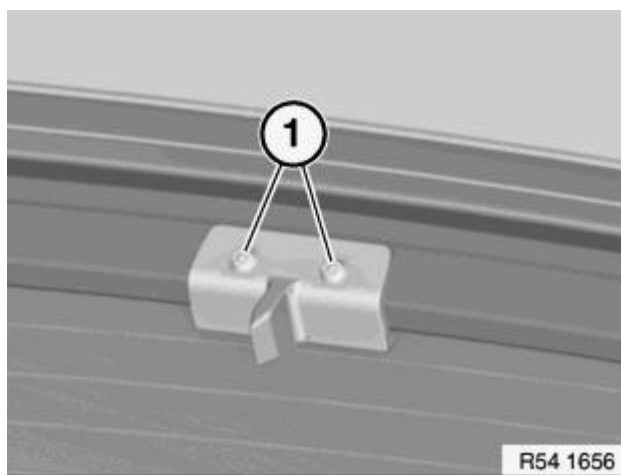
Ensure Fin Fits Into Provided Recess When Roof Shell Is Lowered
